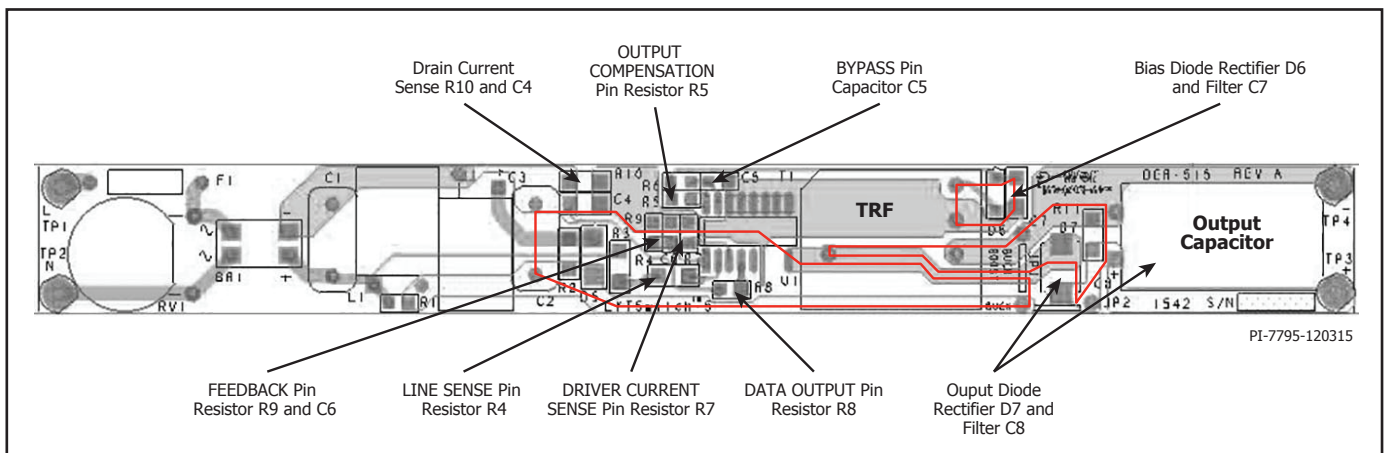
DER-515 PCB Layout Example using SO-16B D Package. Shows the Location of Critical Components and Loop Areas on the PCB Layout.
